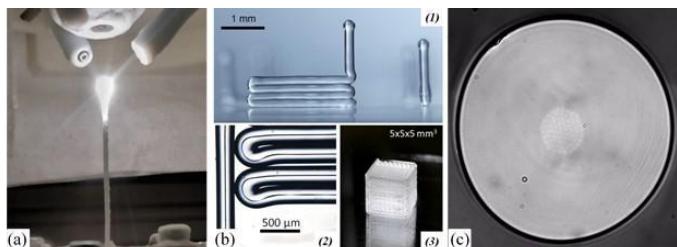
Formation of (a) core rods for optical fiber fabrication using laser cladding, (b1-b3) 3D printed structures using glass filament, and (c) optical fiber with a core region composed of 68 cores. Here a 3D printed core rod was inserted into a glass tube and drawn into a 125 μm diameter fiber.
